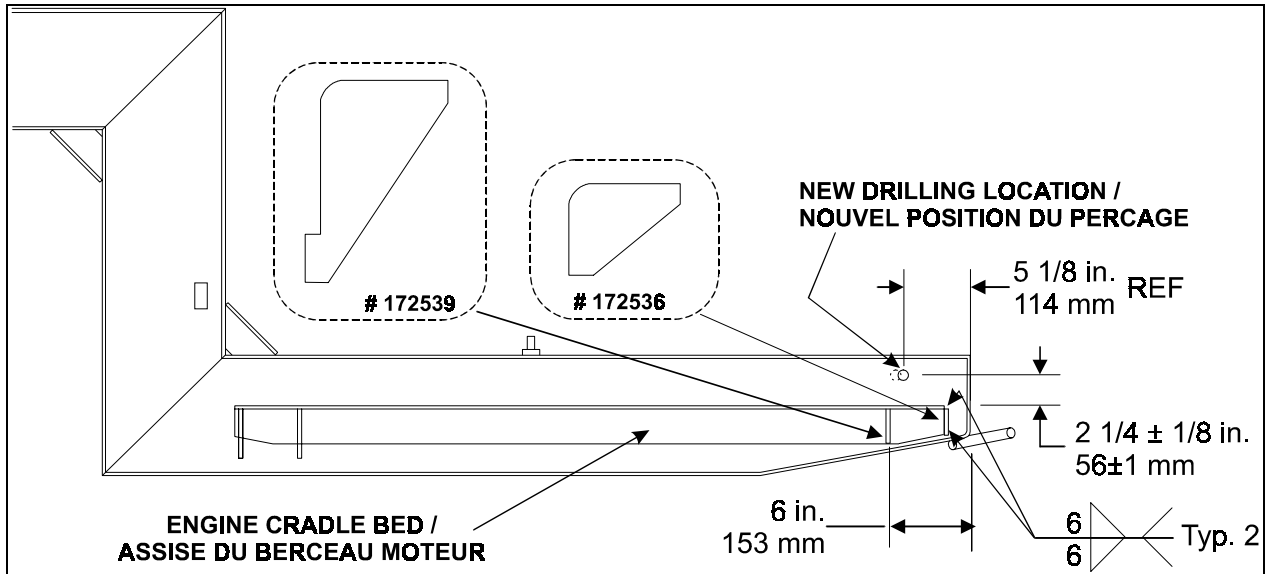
WELDING REINFORCEMENT BRACKETS ON XL-40, XL-45E, XLII-40 AND XLII-45E ENGINE CRADLE BED (SAME FOR BOTH SIDES)
